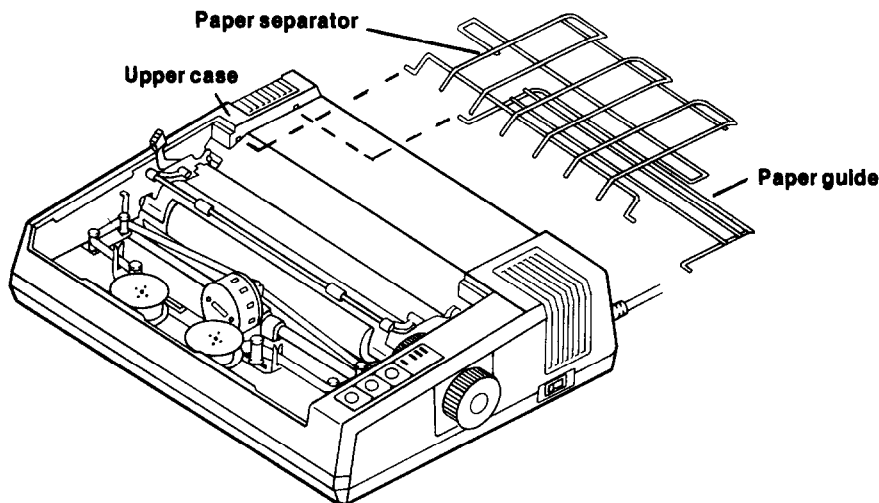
The paper guide and paper separator are inserted in the notches (right and left) indicated for one side in this illustration of the Gemini-10X
